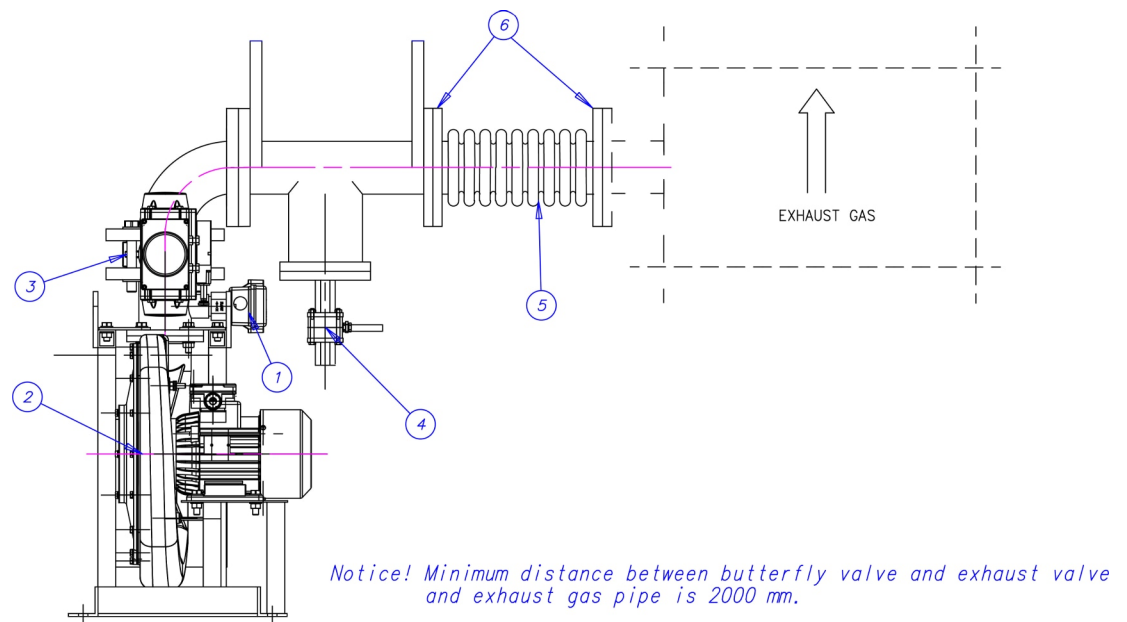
Exhaust gas ventilation arrangement (DAAF315146A)
